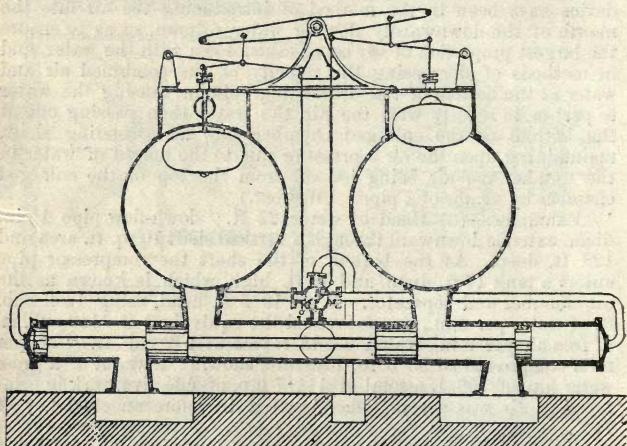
HYDRAULIC AIR COMPRESSOR, MONTEPONI.
